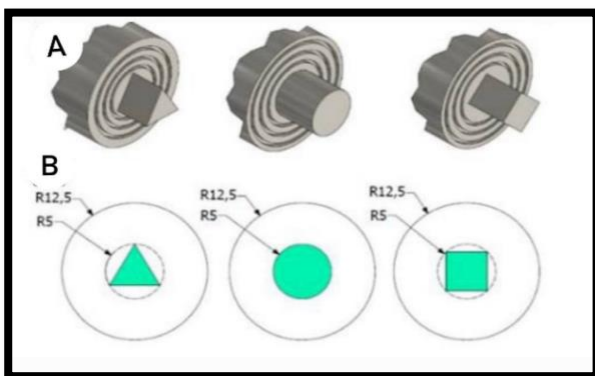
(A) 3D pin shapes, and (B) dimension of BT pins [48].
